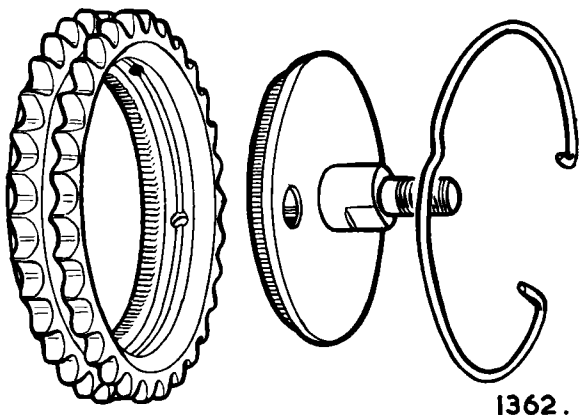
Exploded view of the camshaft sprocket assembly
